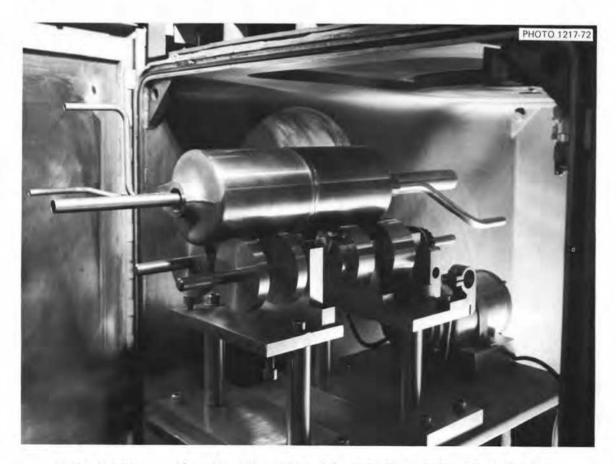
Molybdenum pot formed by an electron-beam girth weld joining two back-extruded half sections.
